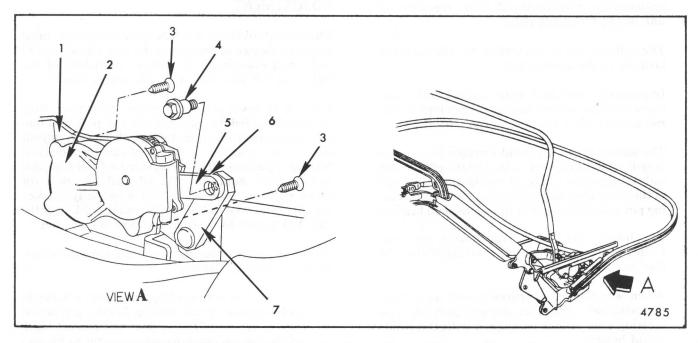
Folding Top Actuator Attachment (View in Direction of Arrow "A")
